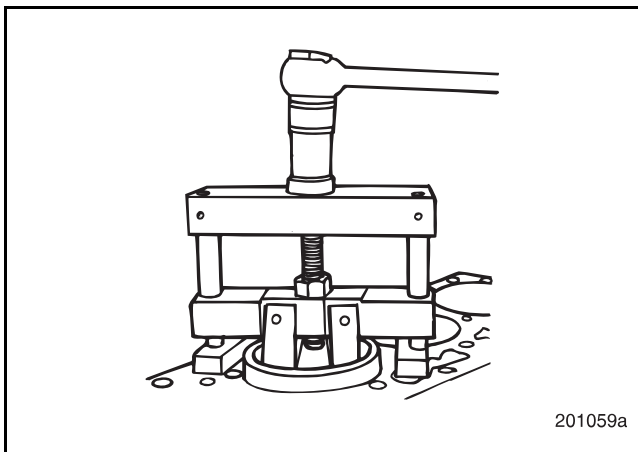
Cylinder Liner/Sleeve Puller PT6435
